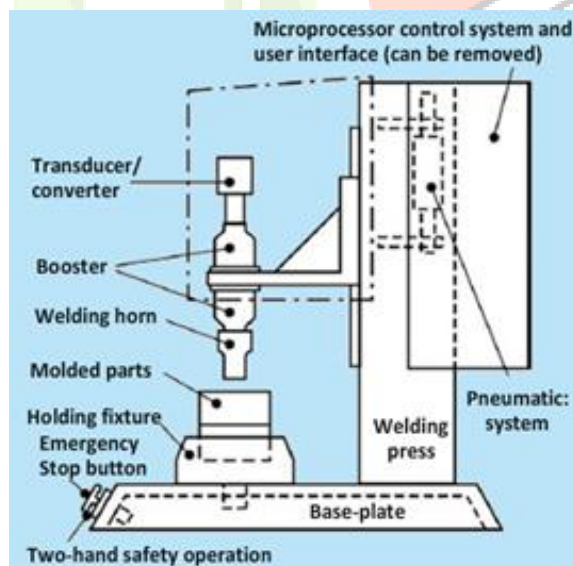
Ultrasonic Welding Set -Up[2]
